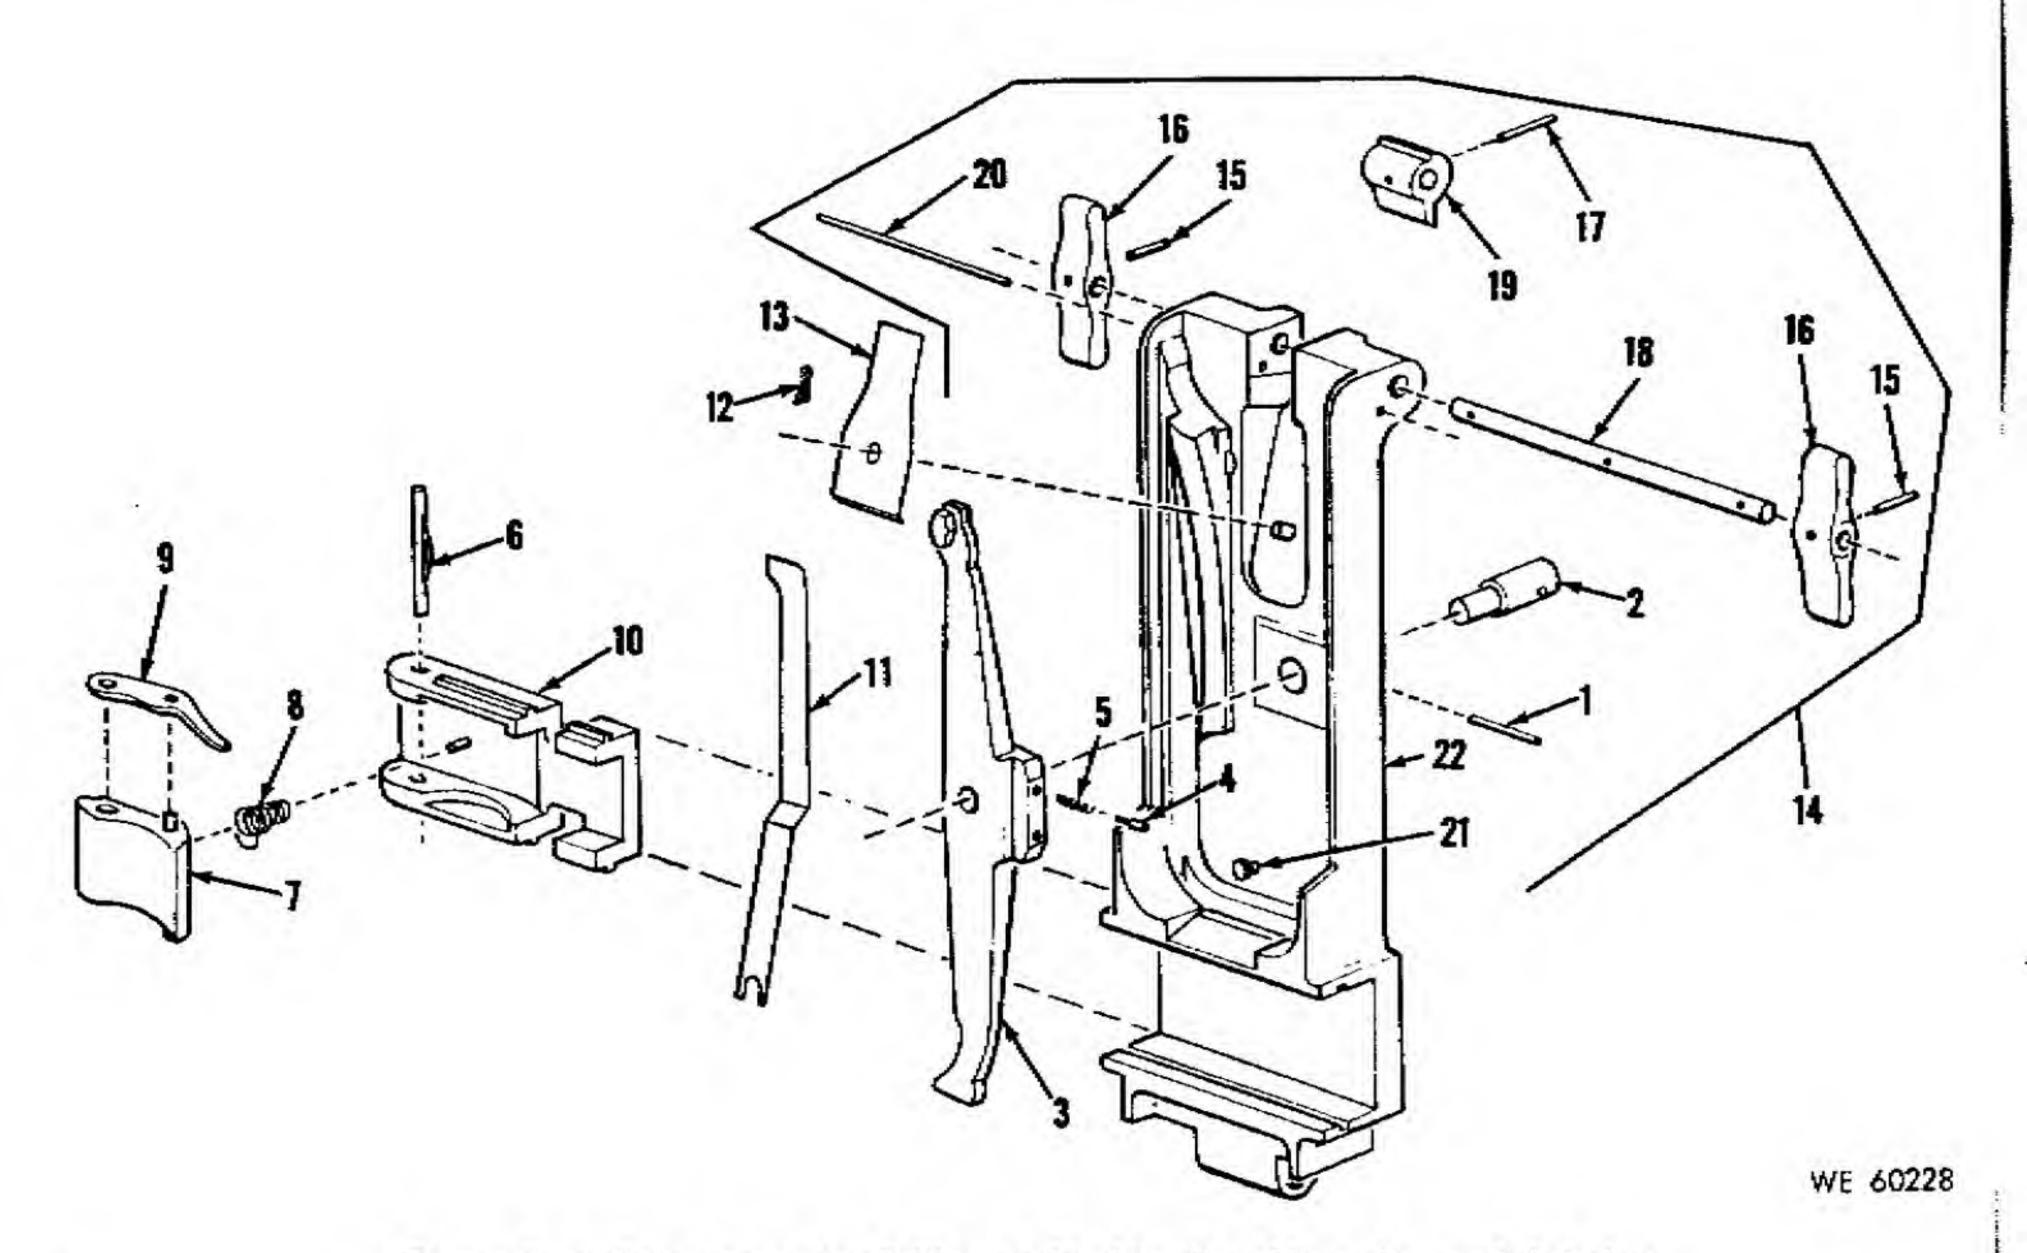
Cover group for Caliber 30 Machine Gun, M37 only—exploded view.
